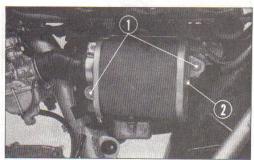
SL175 ① 6 mm bolts ② Mounting bolt
